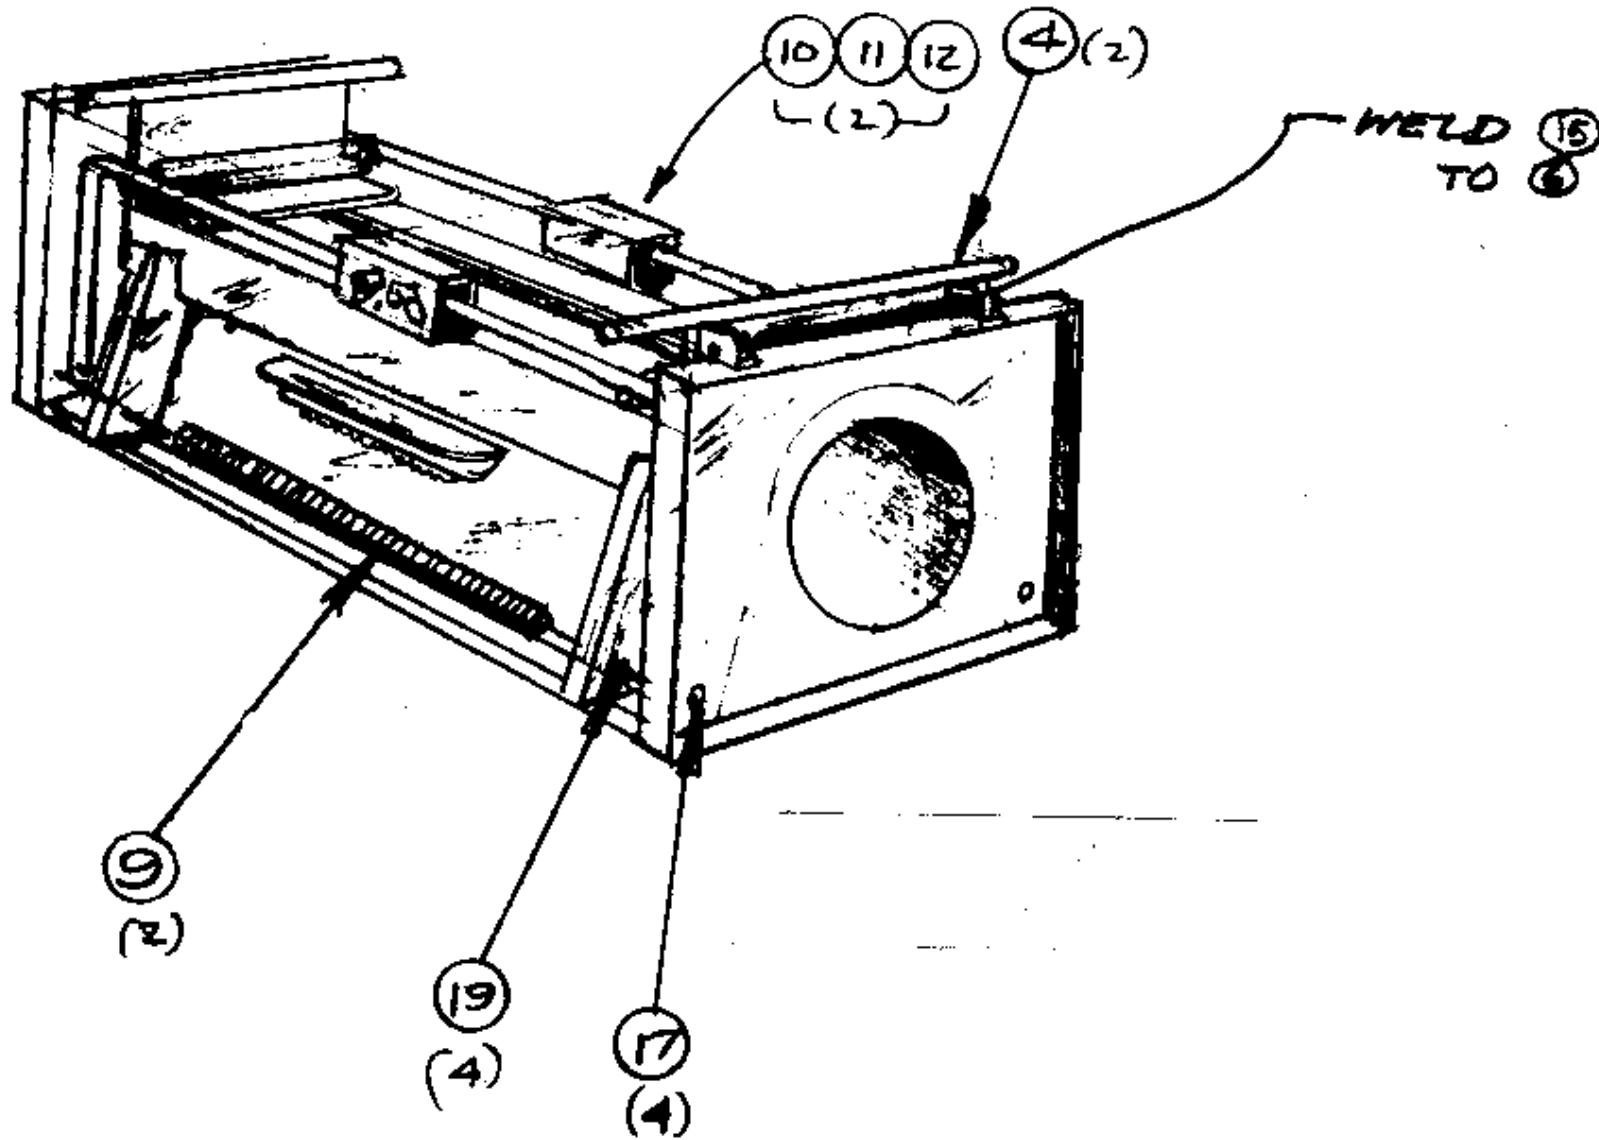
ATTACH DOORS WITH HINGEPIN (15), WELD IN PLACE, AND PUT SPRINGS (9), CONNECTORS (19), AND ATTACHMENTS (17) IN PLACE. UNIT IS NOW COMPLETE EXCEPT FOR PARTS 10,11 AND 12, WHICH NOW CAN BE INSTALLED.
